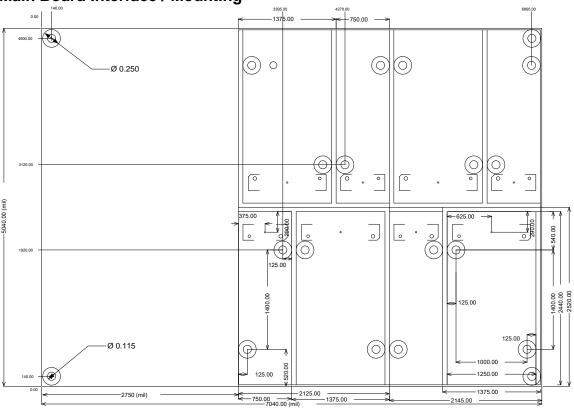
MDK-MB PCB Outline and Mounting Hole Locations (Top View, mils)
